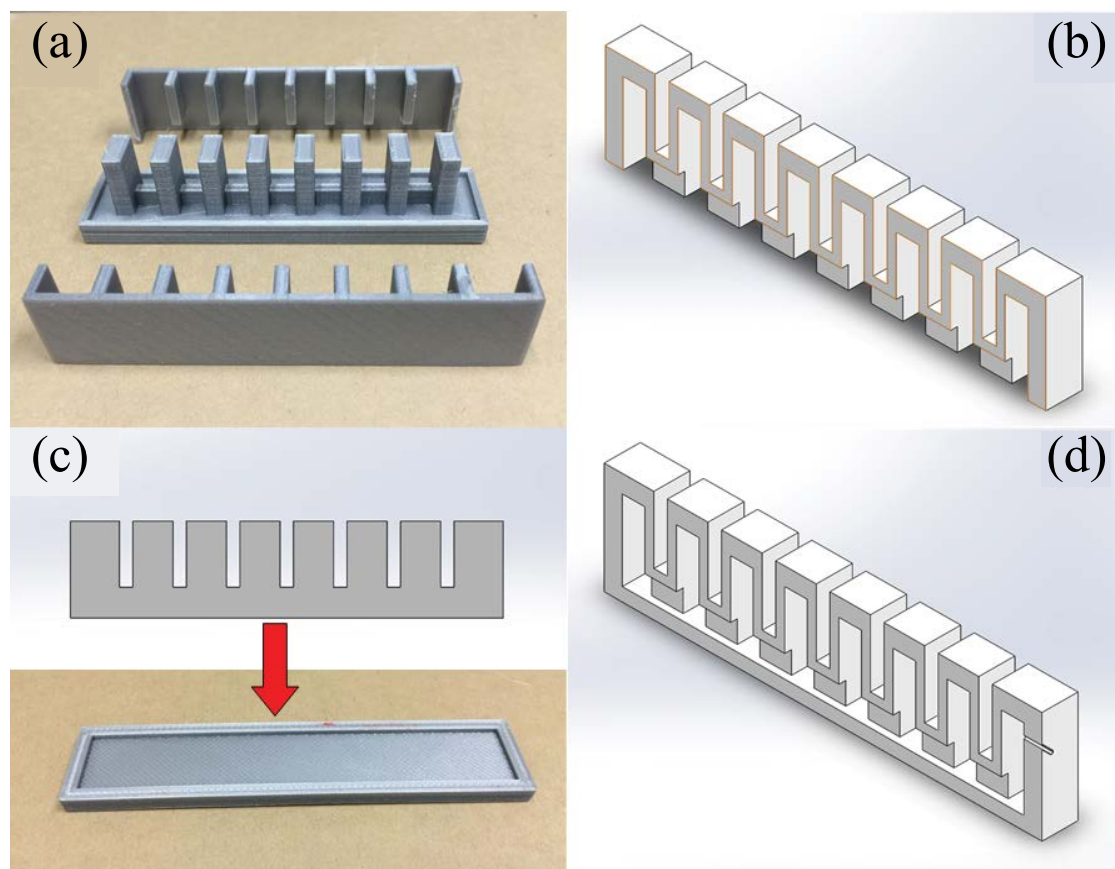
Fabrication process of the inchworm robot a) A picture of the 3D printed molds for the fabrication of the top of inchworm robot; b) A cross-sectional view of the SolidWorks model of the rubber robot top that is fabricated with the molds in (a). The model is open on the bottom; c) A picture of the 3D printed bottom mold. The rubber top will be bonded on the rubber bottom to form the air cavity; d) A cross sectional view of the SolidWorks model of the inchworm robot model after the top and bottom are bonded. The vented screw is not shown in the figure.
